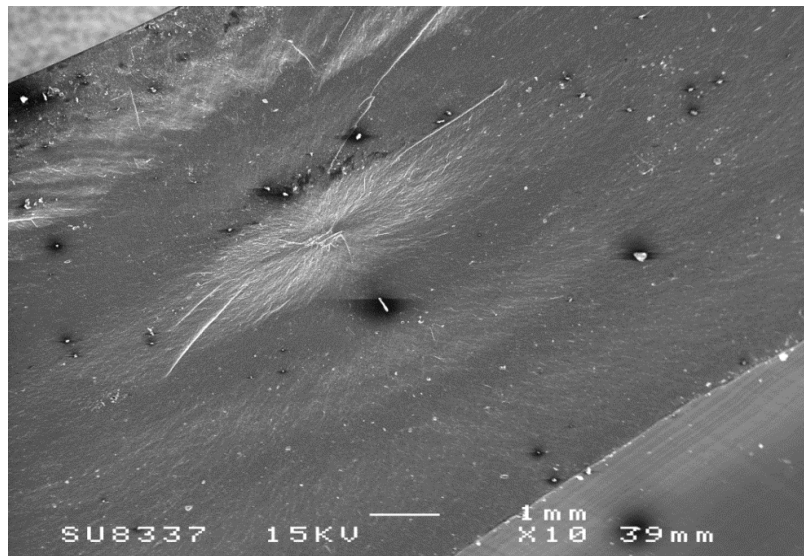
A Fracture surface of a spring seal showing small multiple cracks propagating from an inherent flaw.
